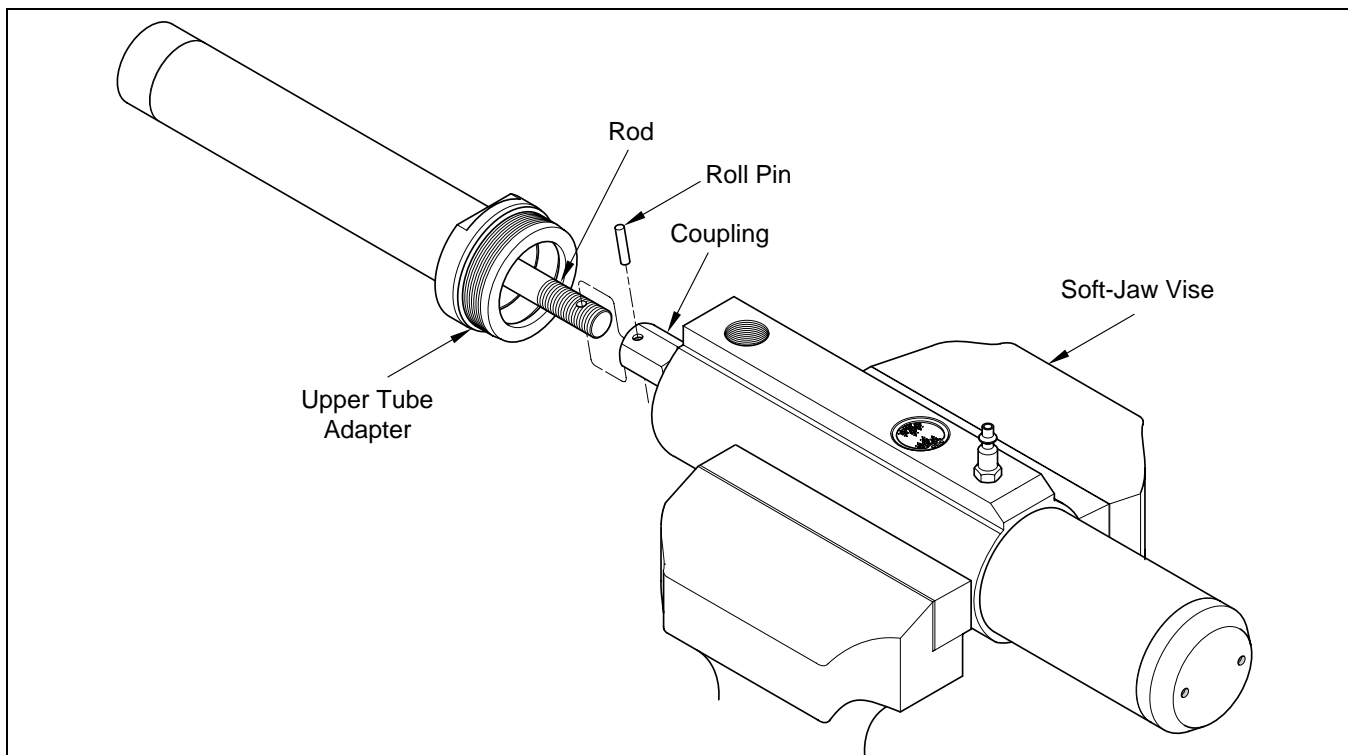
Separation of Pump Tube Assembly from the Air Motor
